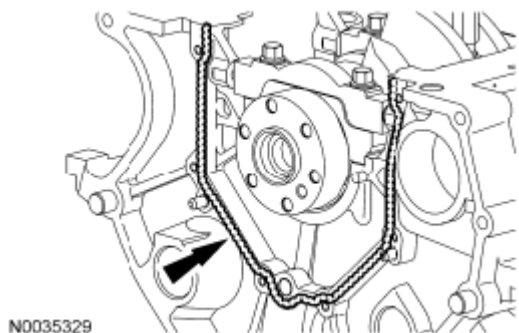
Locating Crankshaft Rear Seal Retainer Mating Surface On Engine Block
